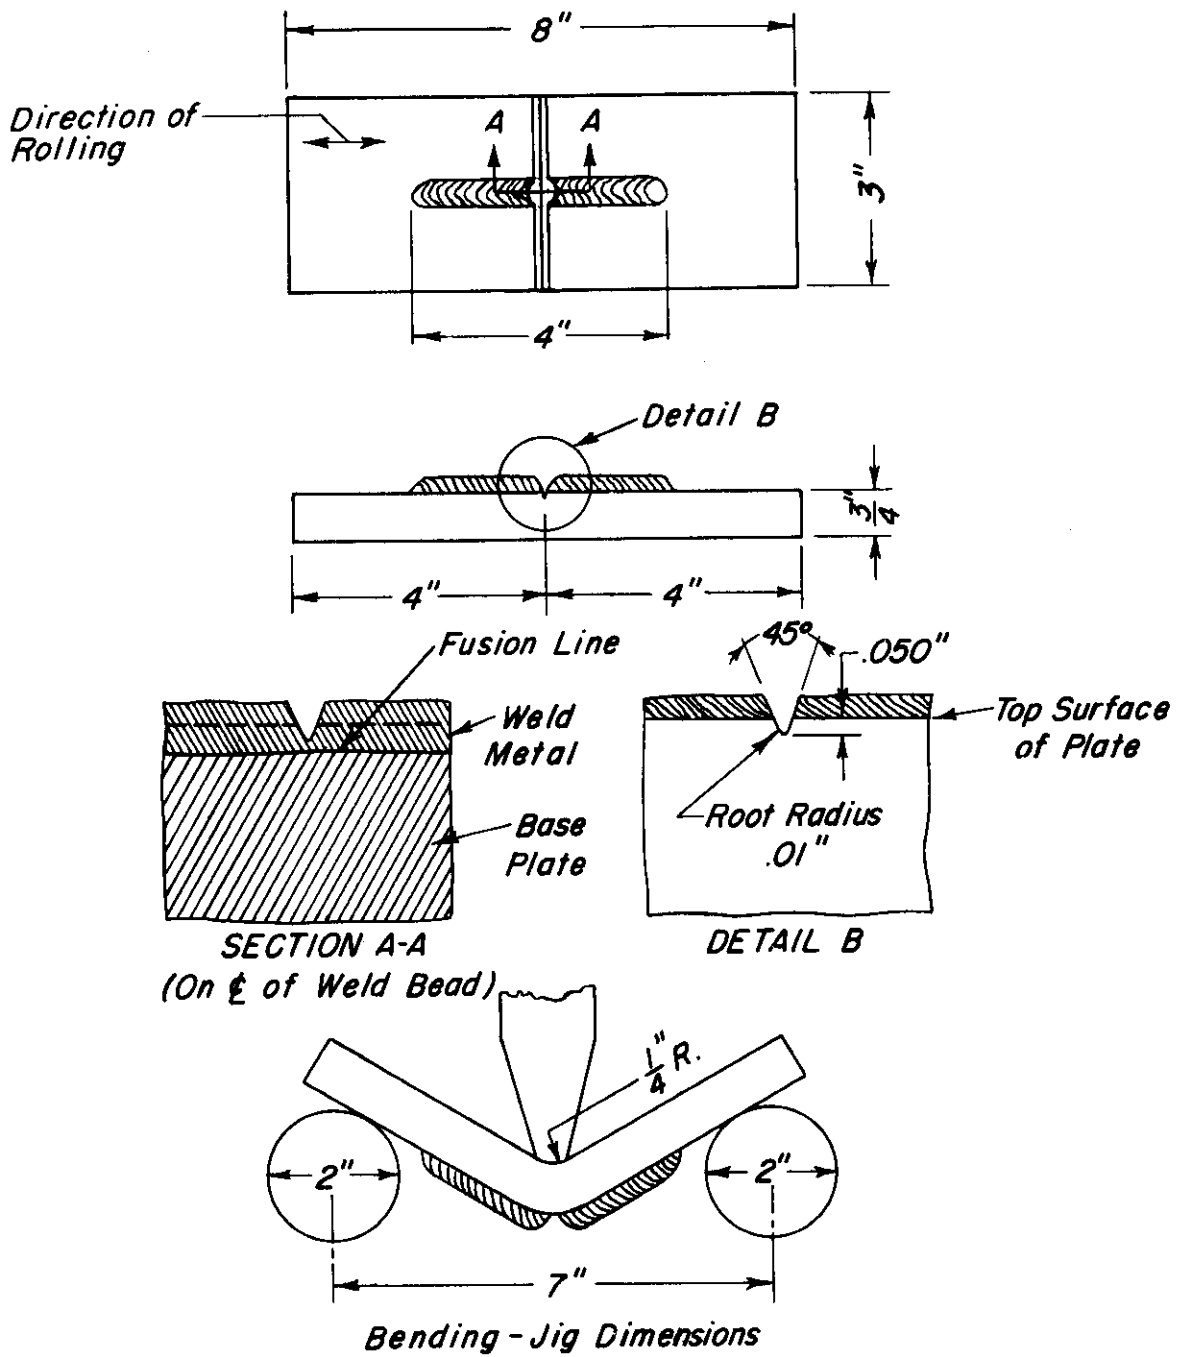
BEND SPECIMEN WITH LONGITUDINAL WELD BEAD AND TRANSVERSE NOTCH (KINZEL DESIGN)
